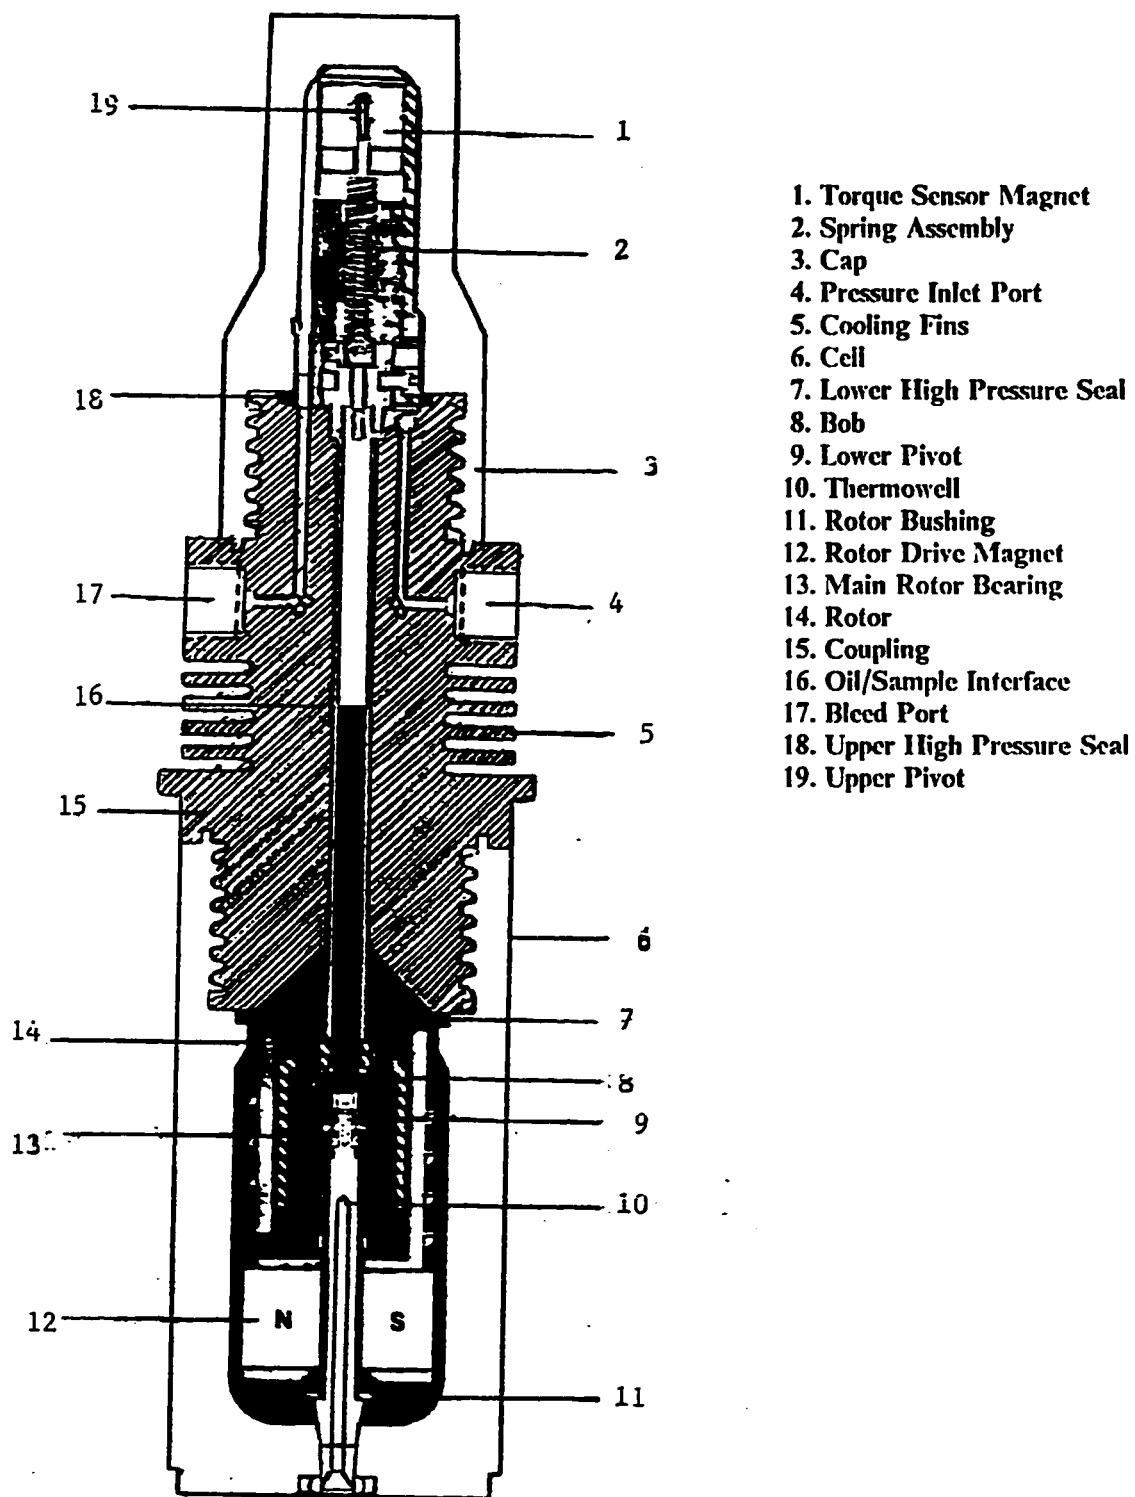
Test Cell and Accessories [ Ref.27 ].
